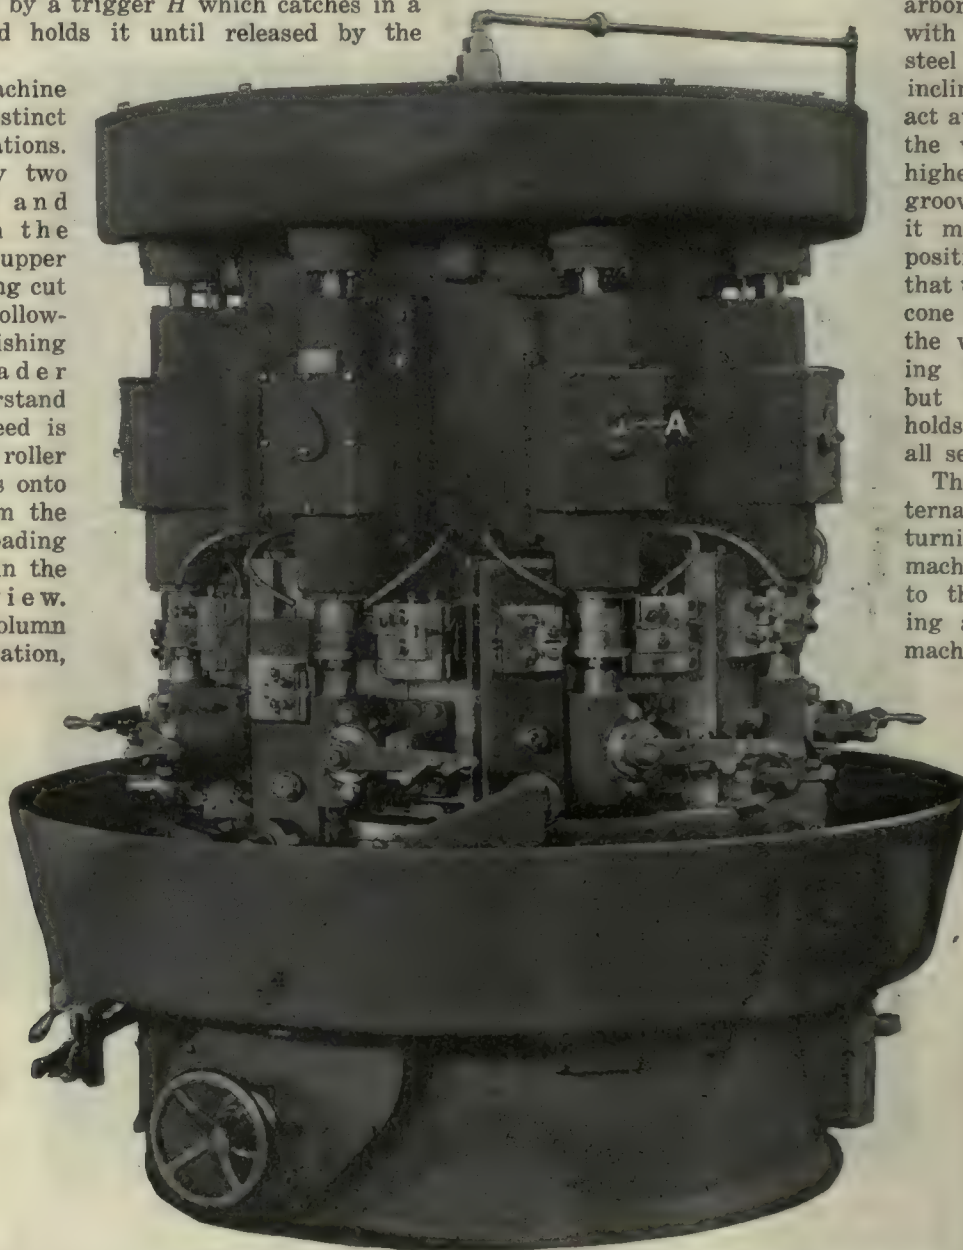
LOADING SIDE OF THE FOOTE-BURT CONTINUOUS TURNING MACHINE
